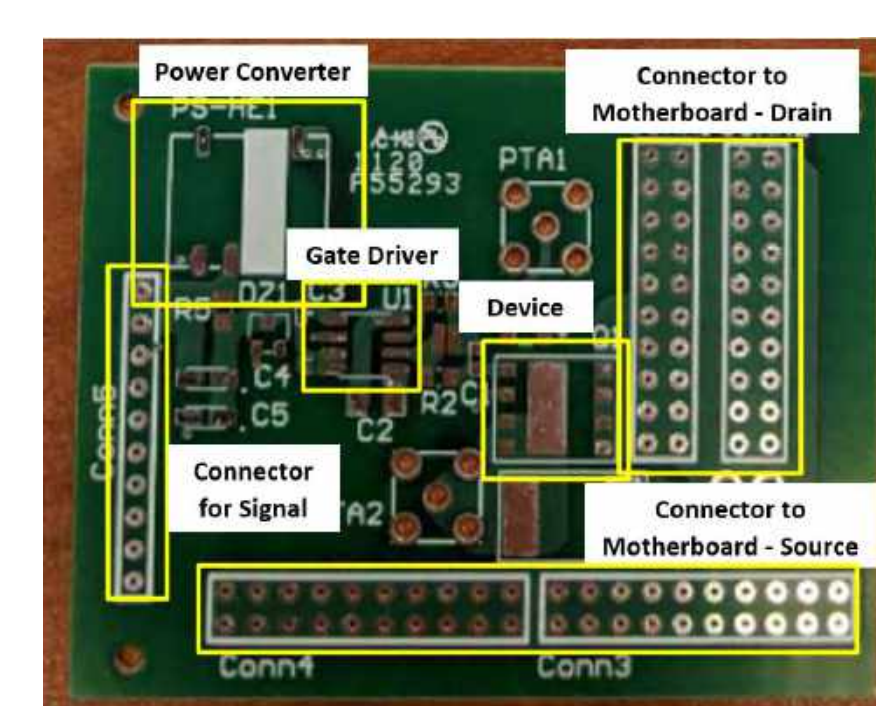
Manufactured PCB-Daughterboard without Assembling
